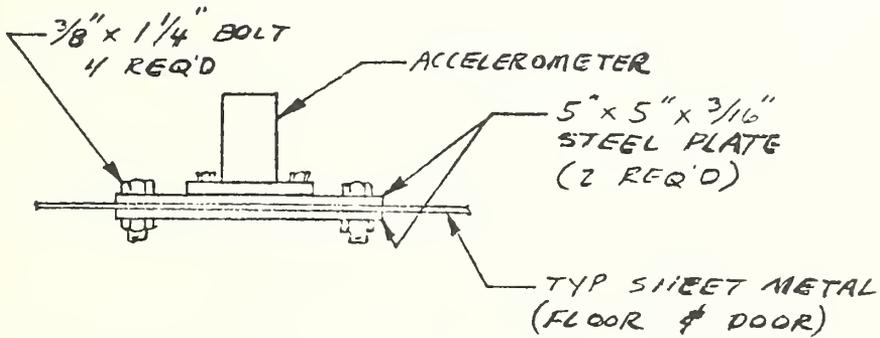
Typical Accelerometer Mounting on Sheet Metal Surfaces
